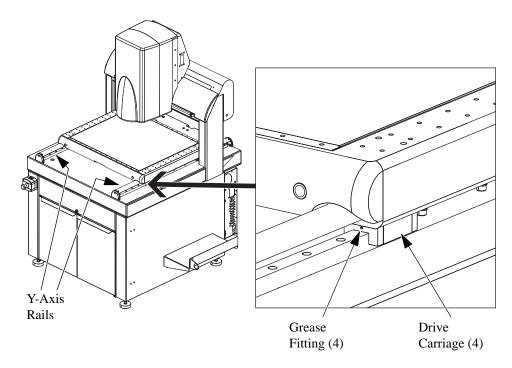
Cleaning and Lubricating the Y-Axis Rails
